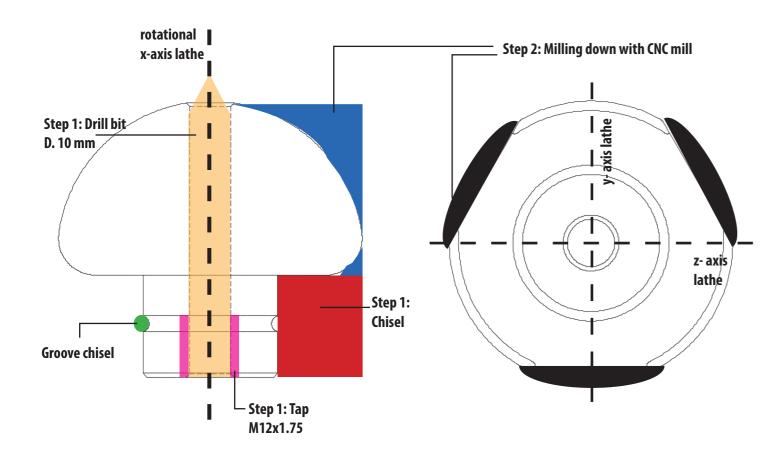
Overview of Lathe and milling work steps; Modular Handle
